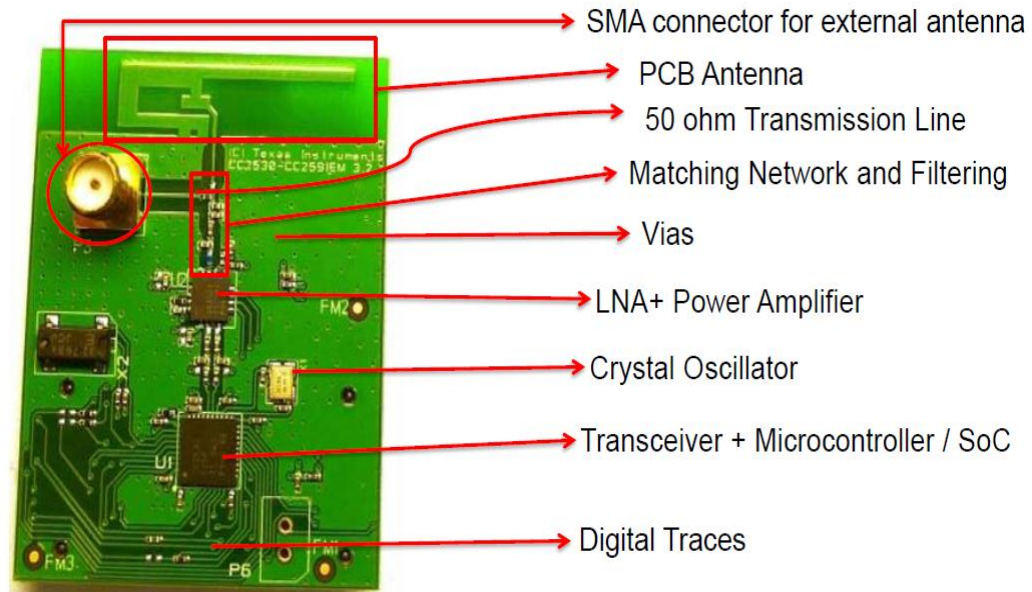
Proper component layout for an optimised RF PCB design [49]
